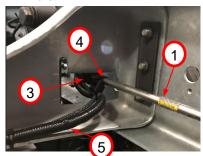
PRD vent tube (1), tube clamp (3), dual tie strap clip (4), chassis harness (5).
